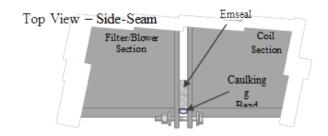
TIGHTENED SECTION FASTENING BOLTS ▼
